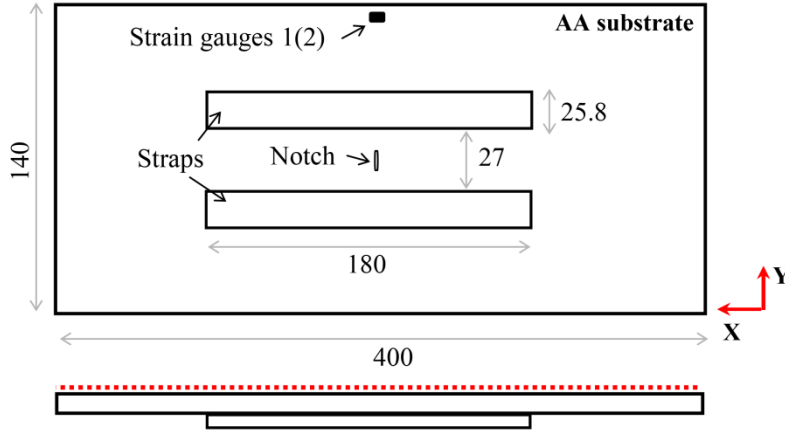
Geometry and dimensions of M(T) specimen reinforced with a pair of GLARE straps (unit: mm).
